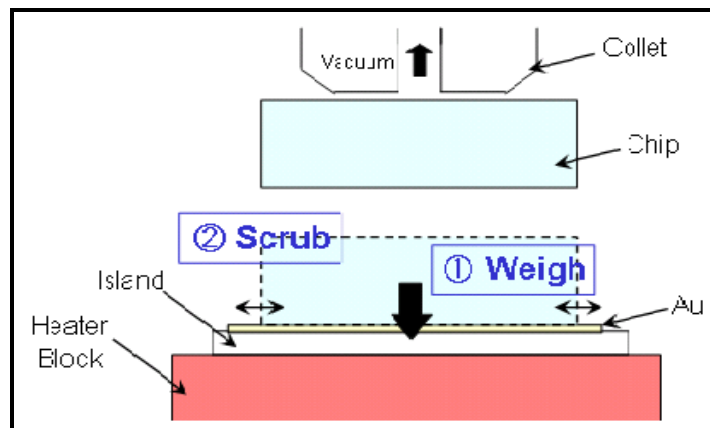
Mounting Mechanism for Au-Si Eutectic Mounting
